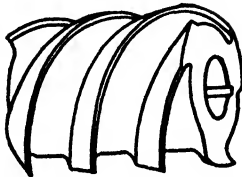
Helical Plain Milling Cutter (Hole Type).
